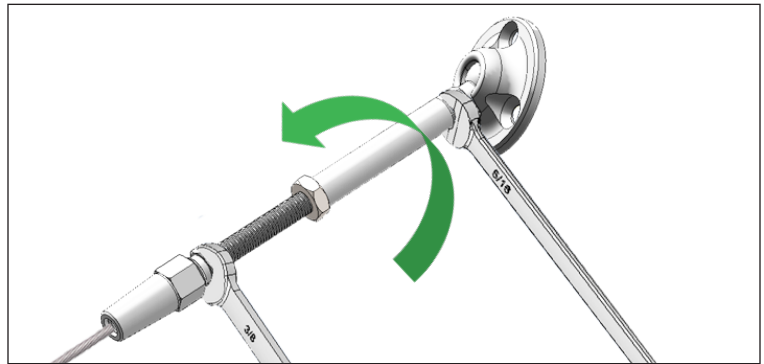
Figure D. Hold the threaded stud in place and rotate the tensioner body.
